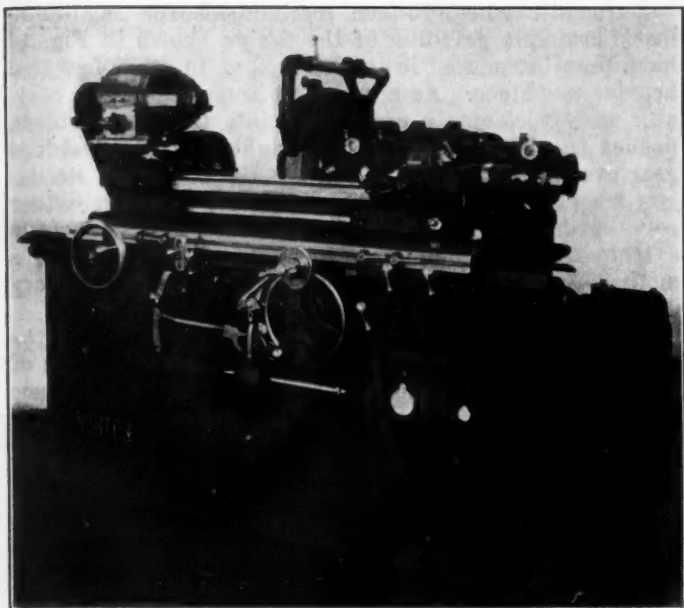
A SELF-CONTAINED TYPE OF GRINDING MACHINE EQUIPPED WITH A POWER TABLE TRAVERSE FOR HANDLING OIL-TUBES, ROCKER-ARM SHAFTS AND SIMILAR WORK
